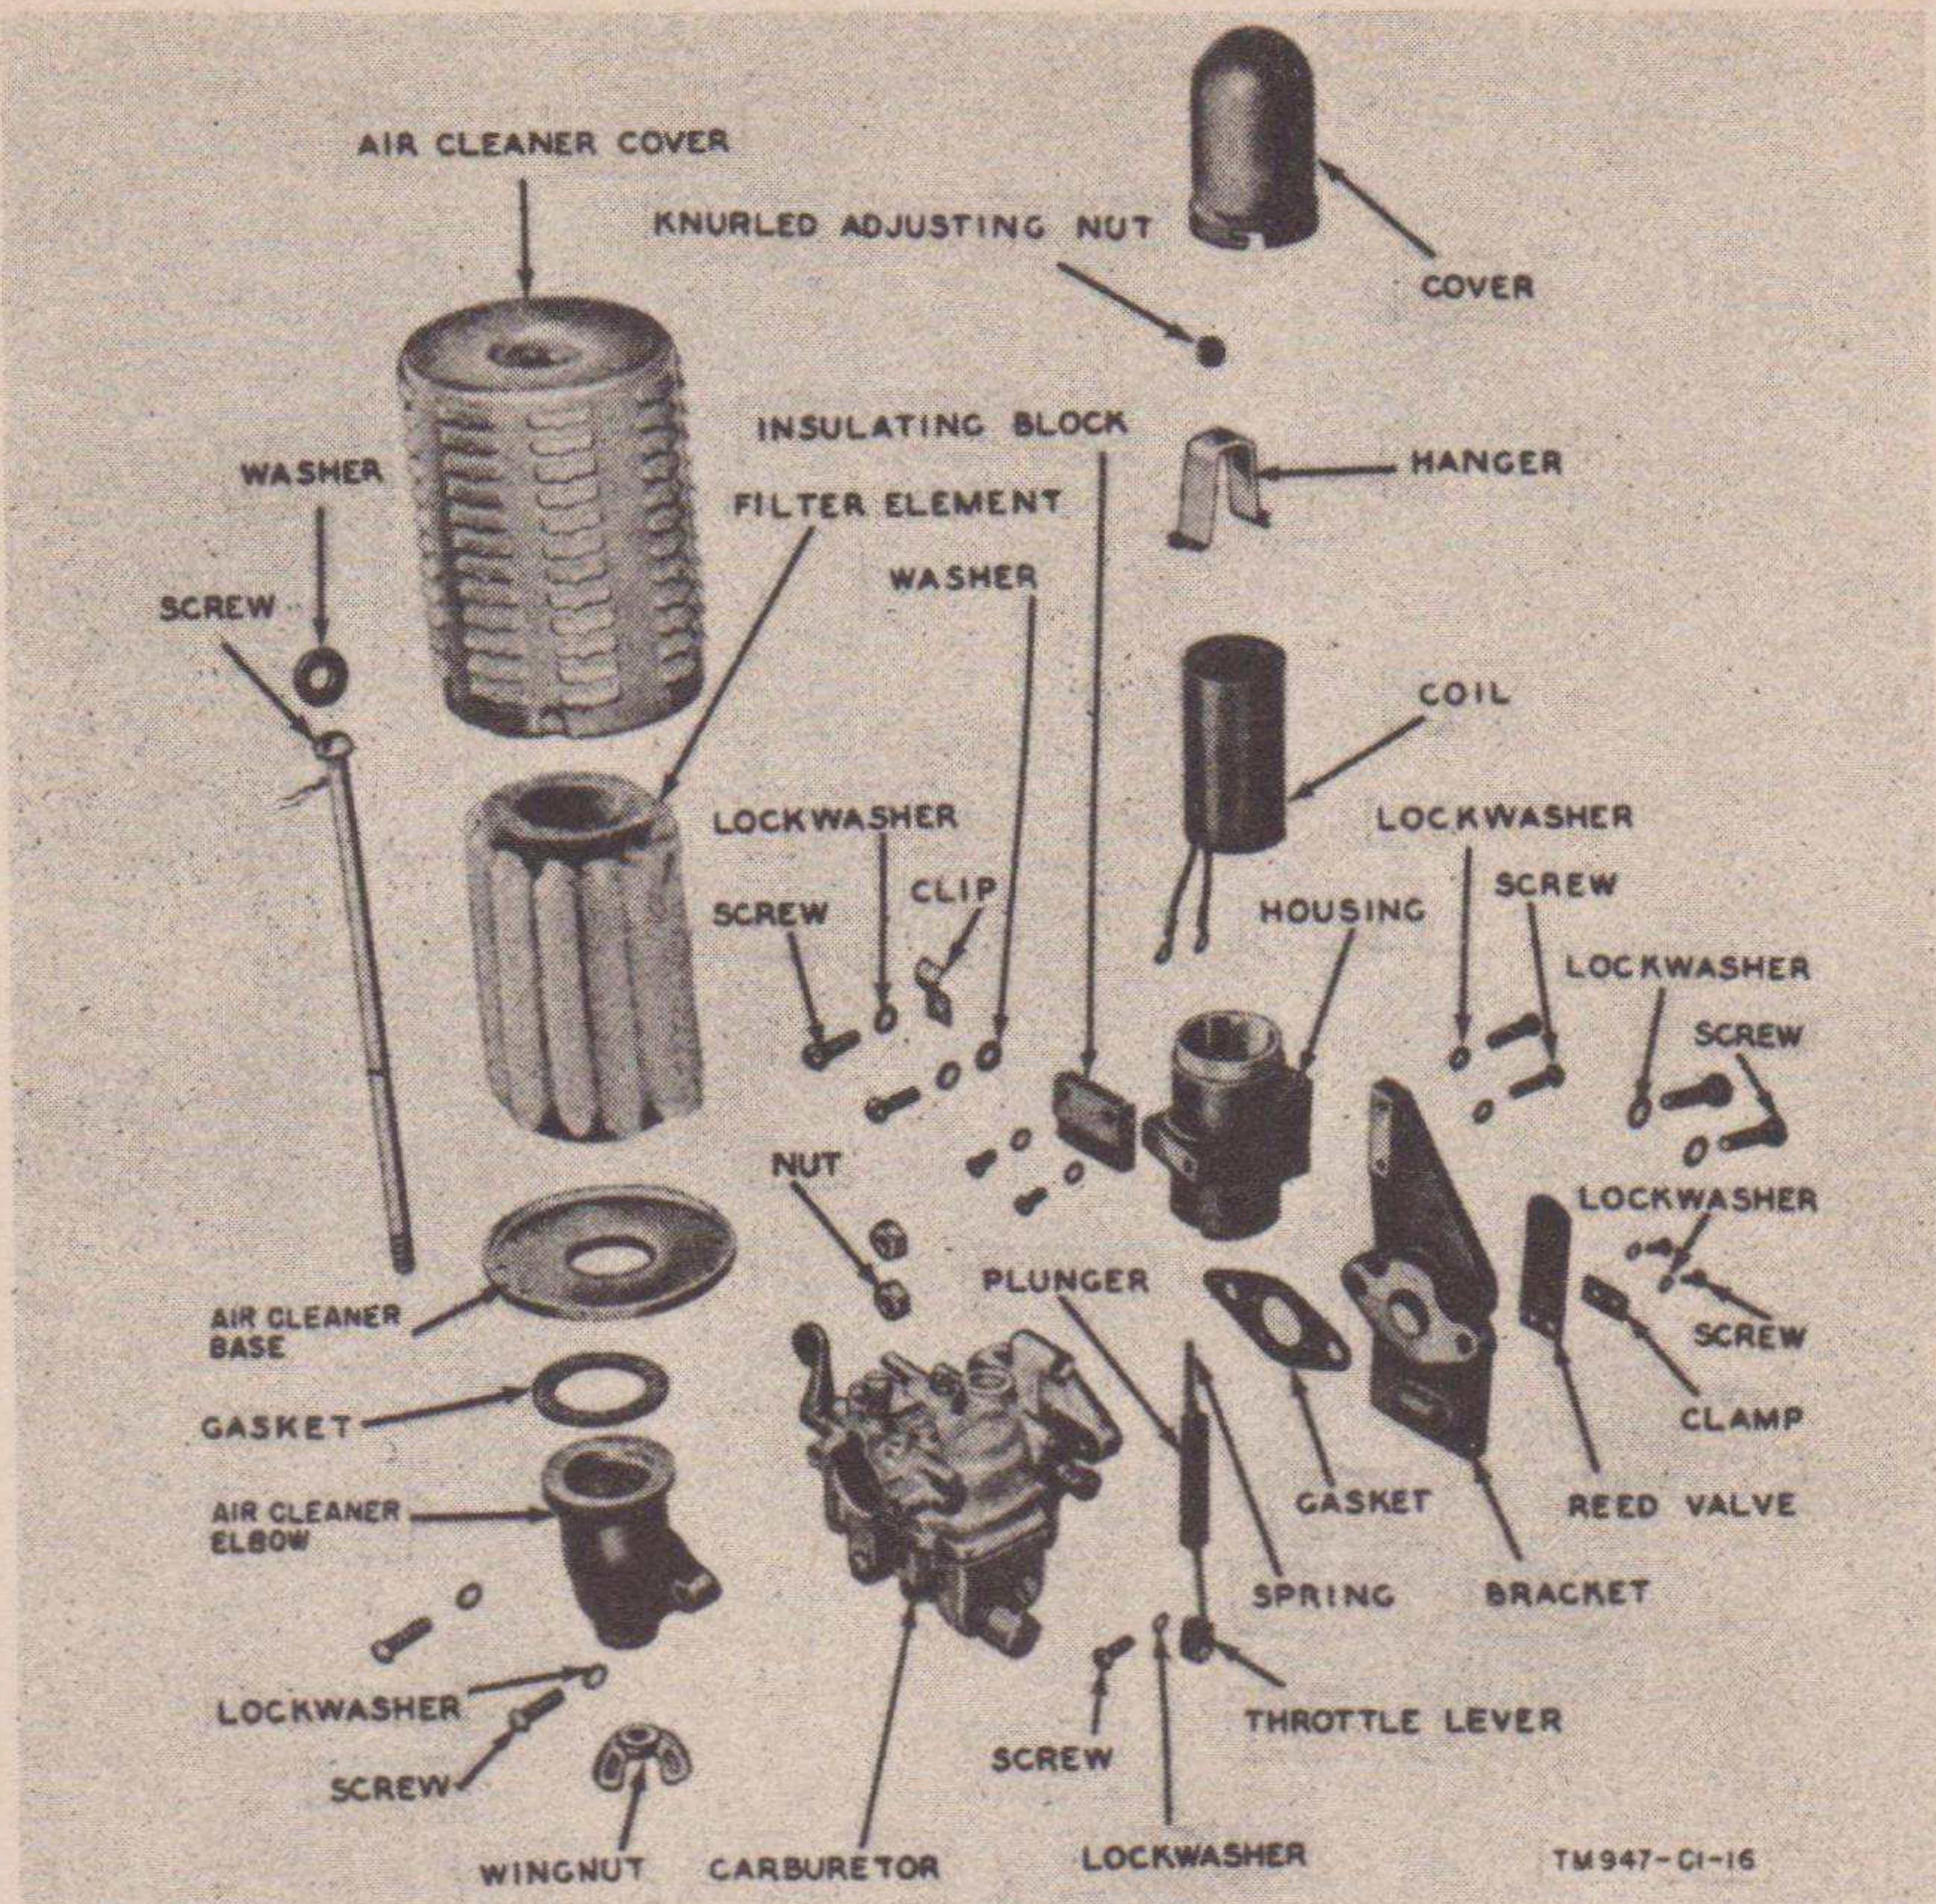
Power Unit PE 210 B, governor, carburetor and air cleaner, exploded view
